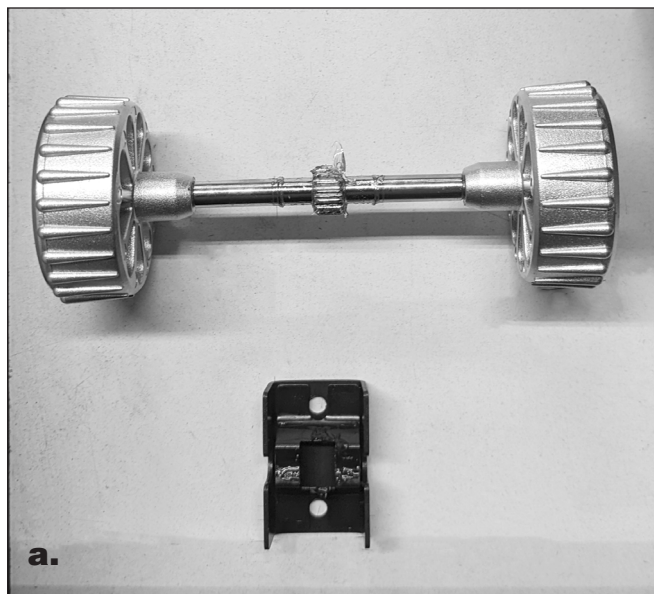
There is a small flat spring intended to maintain tension of the focus knob assembly shaft against the rack gear of the drawtube. Because this connection is greased you may find the flat spring stuck to the focuser housing as shown in Figure 2 or in the cover as shown in Figure 3a. Carefully remove it and set it aside. It will help to take note of the orientation of the spring as you will need to set it back in the same position when reassembling.
